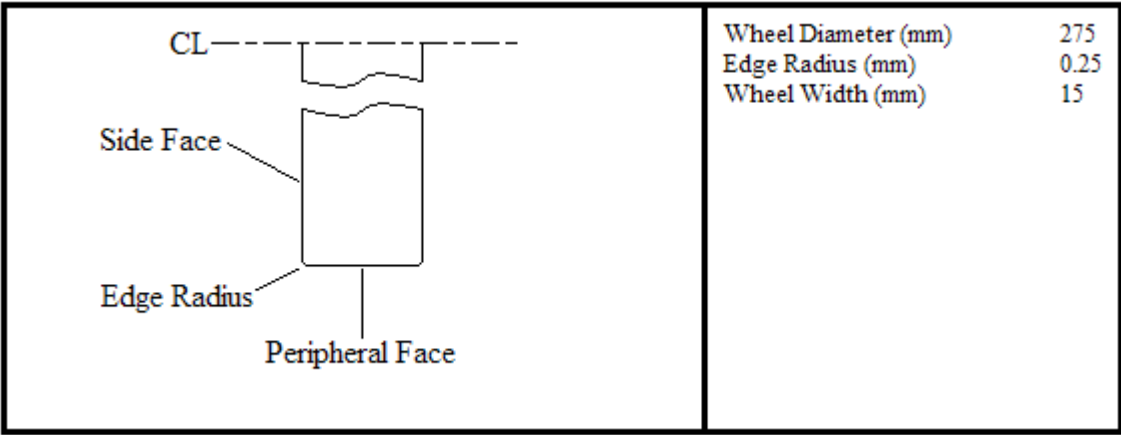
Schematic showing the geometry of the surface grinding wheel
